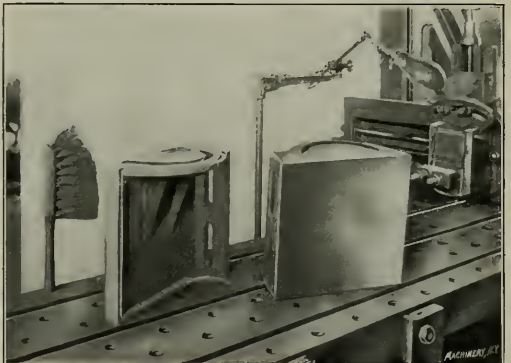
Castings Planed in Manner shown in Fig. 3.
